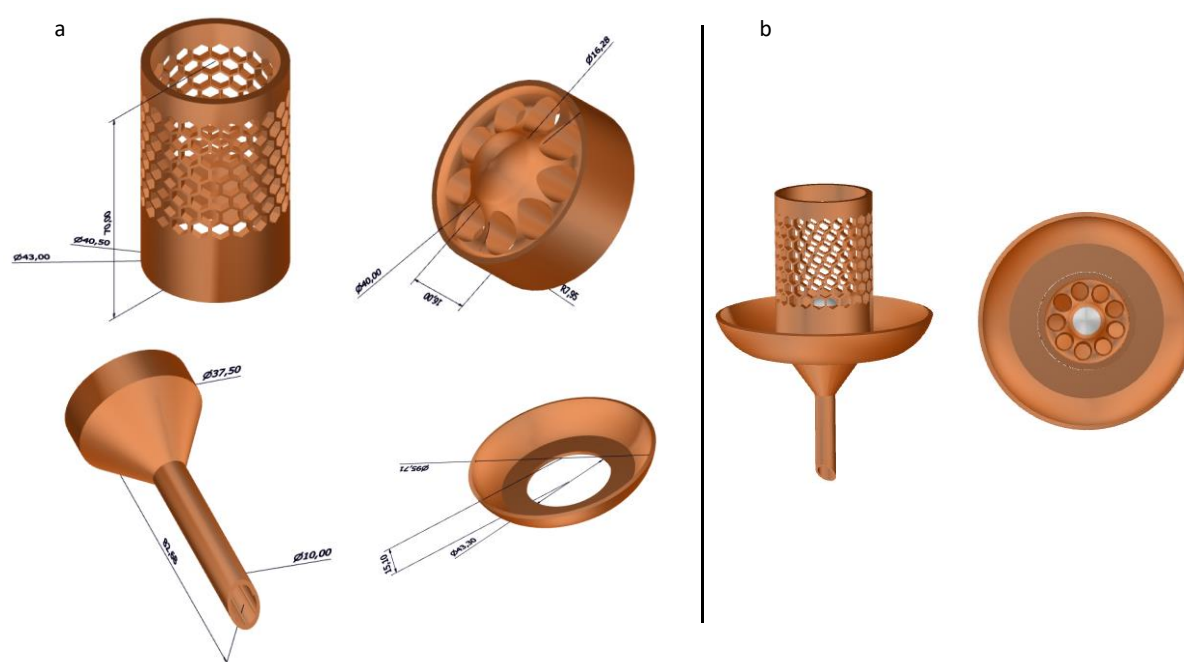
The cornea holder prepared using 3D printer – a) its individual parts with dimensions, b) individual parts assembled together.
